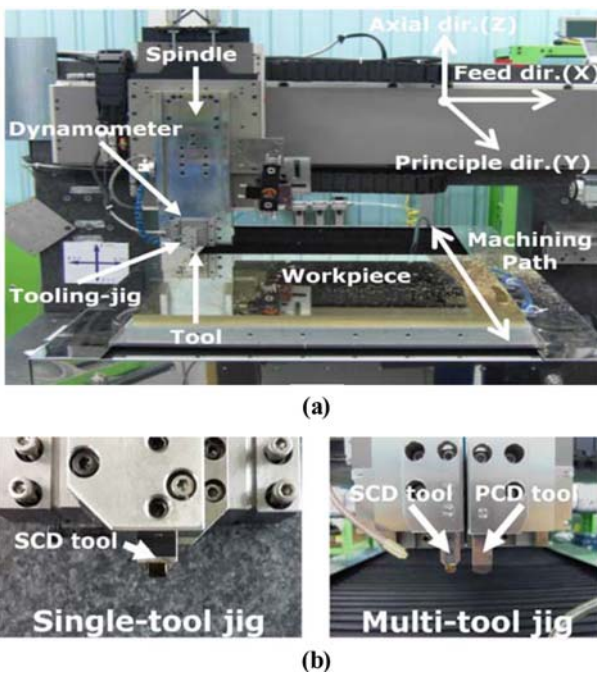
(a) System set-up for experiment and (b) single/multi-tool jigs.
